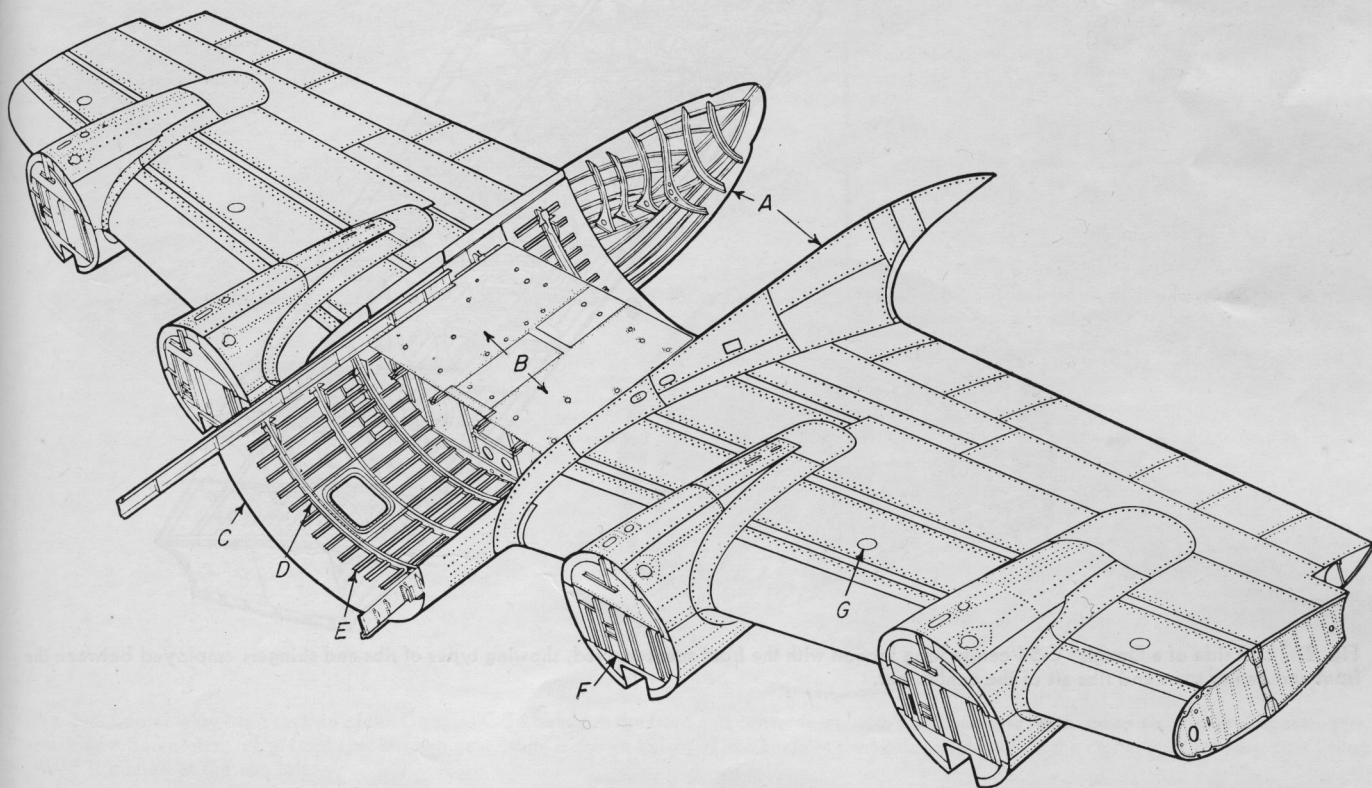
Douglas C-54 center wing panel assembly, showing wing-to-fuselage fillets (*A*); cargo floor panel (*B*); lower fuselage section (*C*) with ring frame sections (*D*); hat-section longerons (*E*); engine nacelle (*F*); integral fuel-tank filler access door (*G*).
